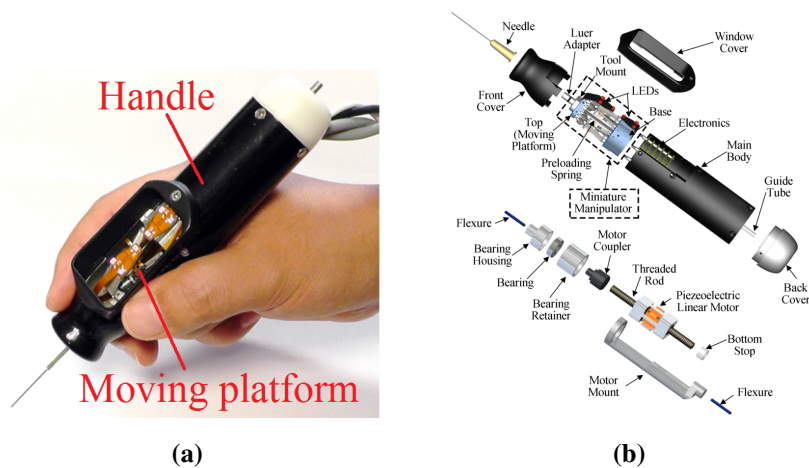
6-DOF Micron prototype. The handle and the moving platform are shown. (a) View of the prototype. (b) View of the handheld manipulator assembly (top) and the linear actuation module (bottom).
